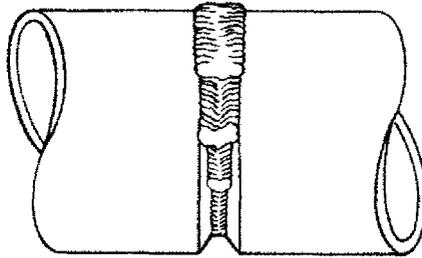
Typical disposition of weld beads on a cross-country pipeline joint.
